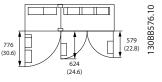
Front Clearance of IP21/IP54 Enclosure Type, Frame Size F12
